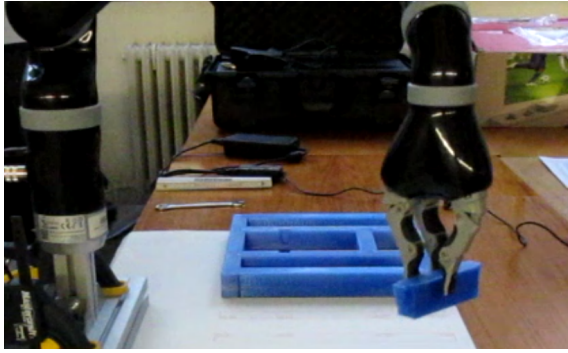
Assembly process carried out by the Kinova Jaco® robotic arm
